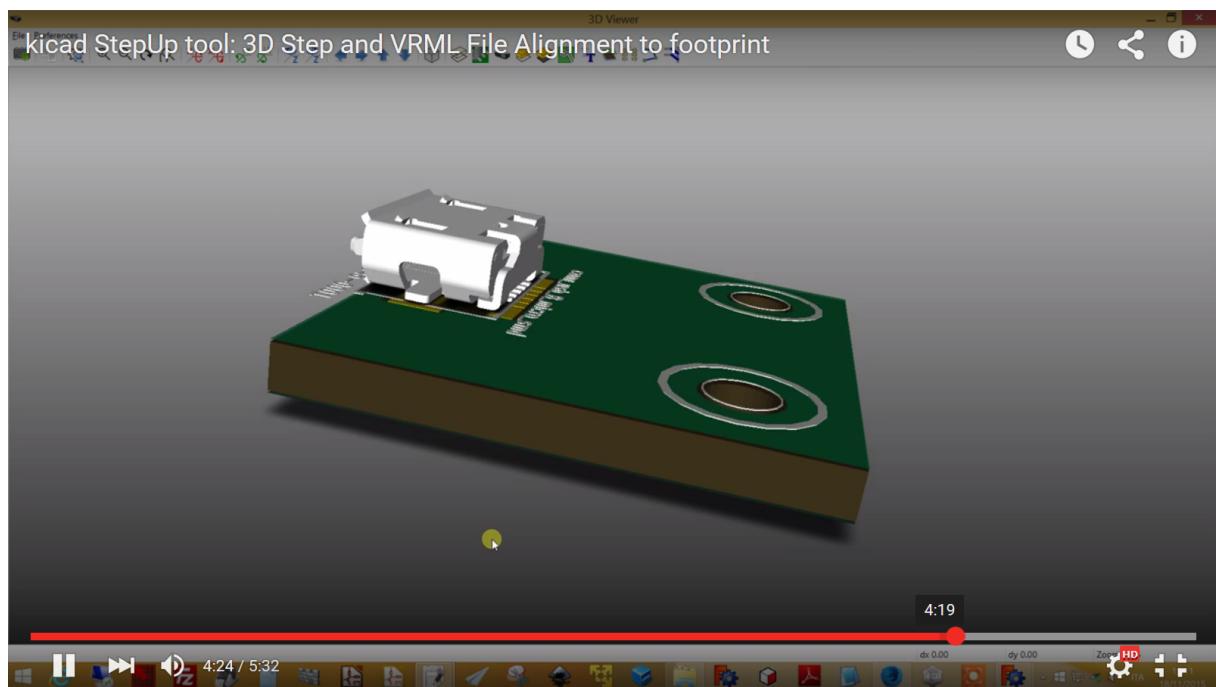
kicad StepUp tools: align 3D STEP and VRML to footprint - video tutorial
